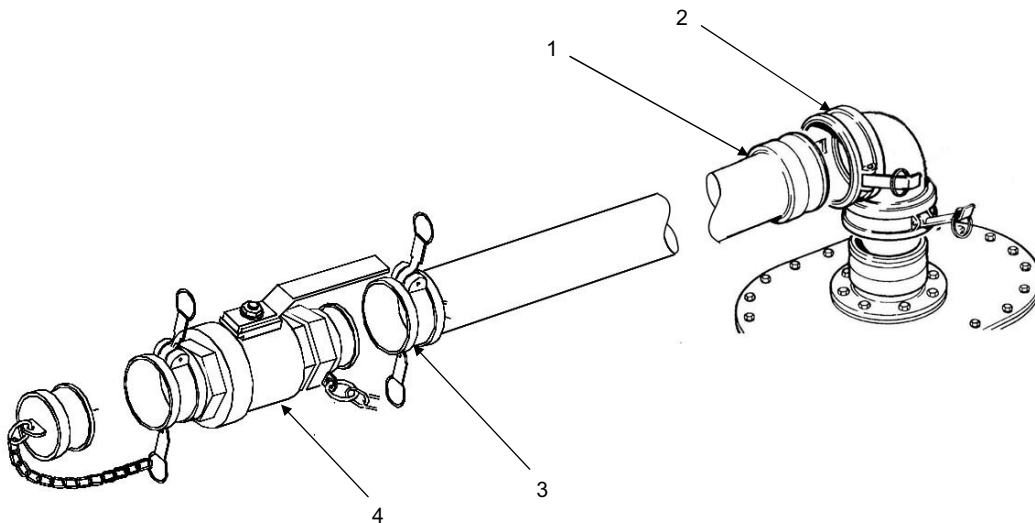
Filler/Discharge Hose Assembly and Shutoff Valve from Fuel Source Host System.
